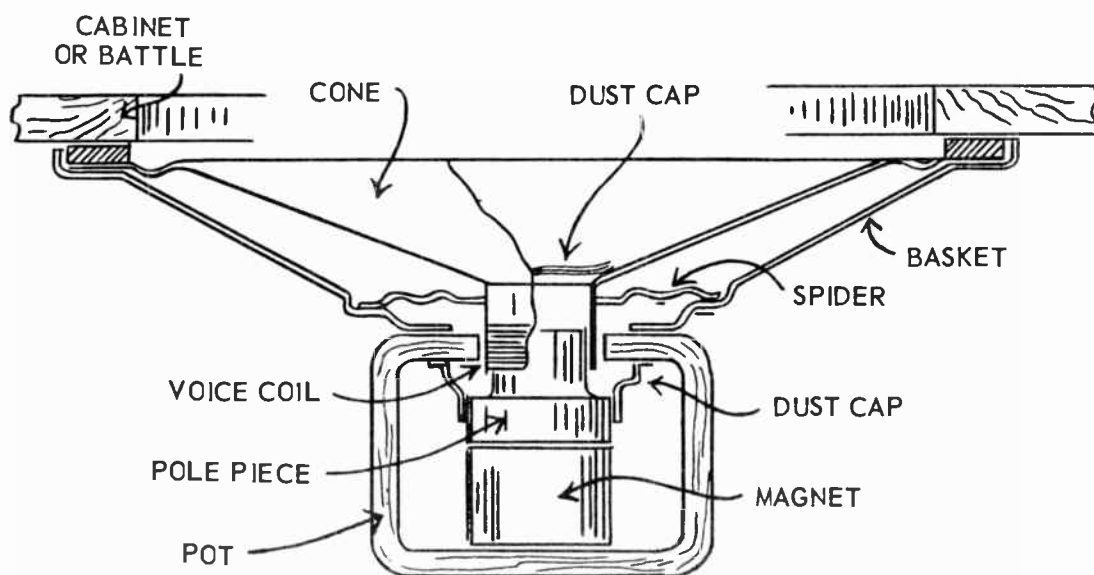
Arrangement of parts in a typical small speaker of the PM type.
